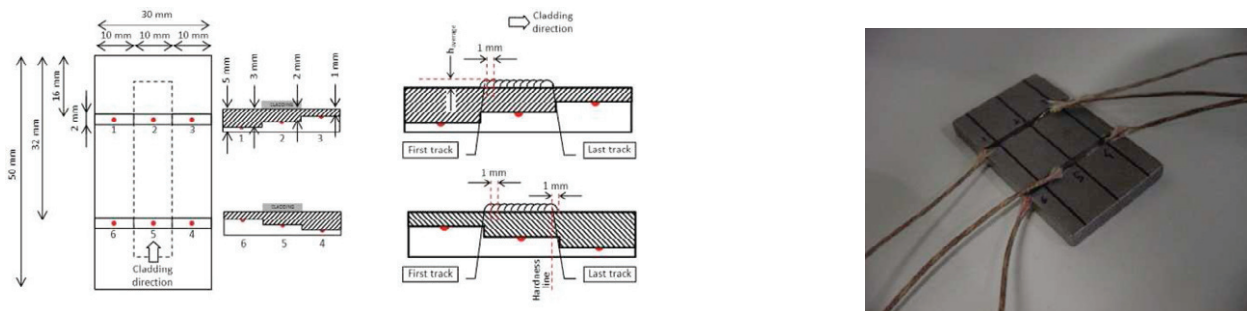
(a) Scheme of the micro-thermocouples and hardness line position (left); (b) Macroview of the workpiece together with thermocouples (right)
